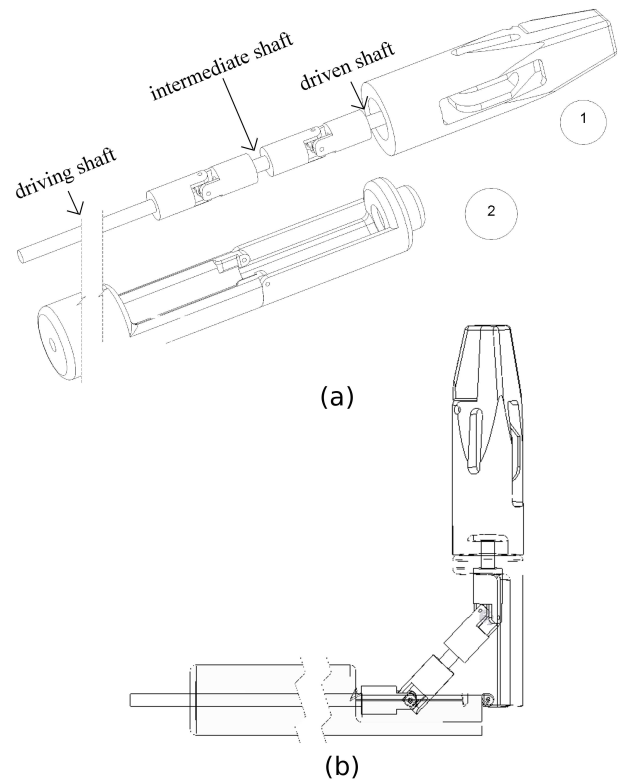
(a) Universal joint and pincer assembly: (1) double universal joint and pincer assembly (2) shell unit, (b) Instrument in 90 degrees yaw position
